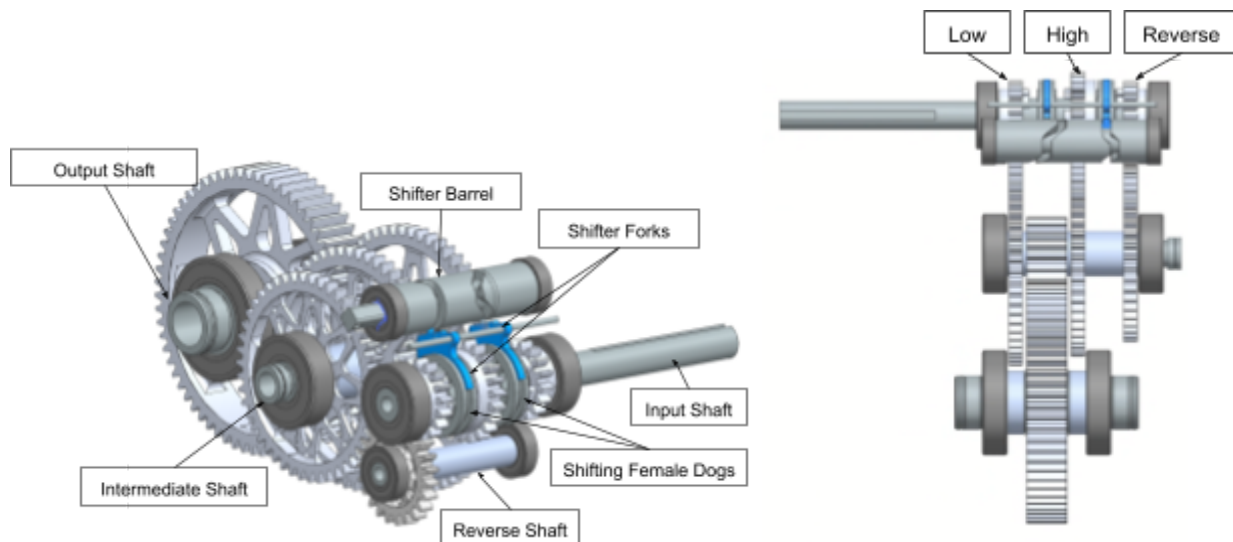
a-b: (a) Isometric view of Gearbox CAD Model (b) Top view of Gearbox CAD Model. Note the low gear and high gear positions have changed with respect to the sketched design for ease of assembly
